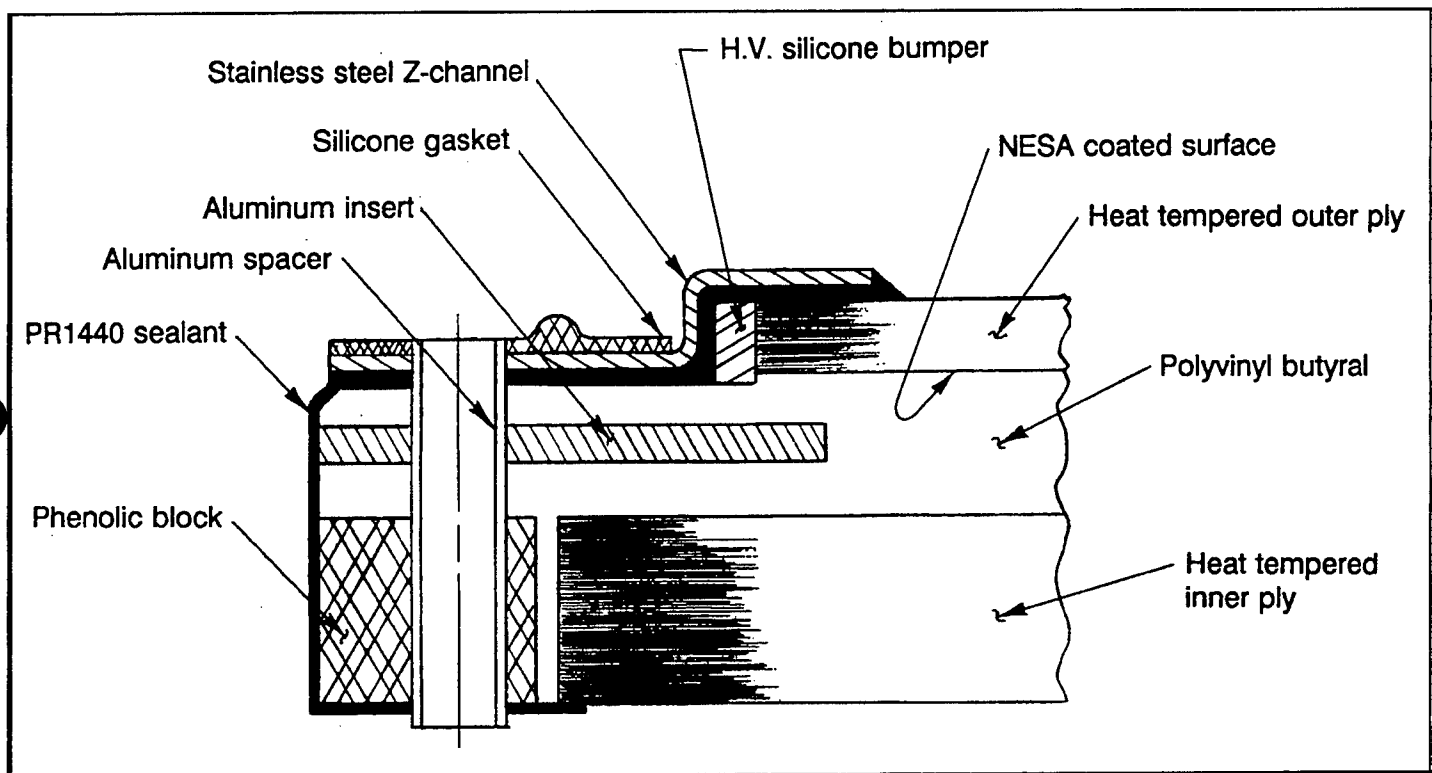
C/KC-135 #1 W/WS Cross-Section
